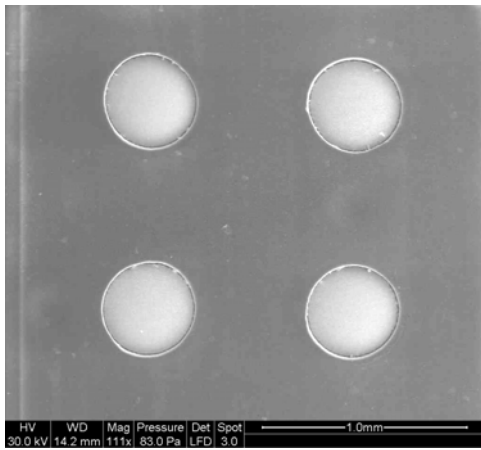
Good solder mask of a BGA after low-temperature wave solder method
